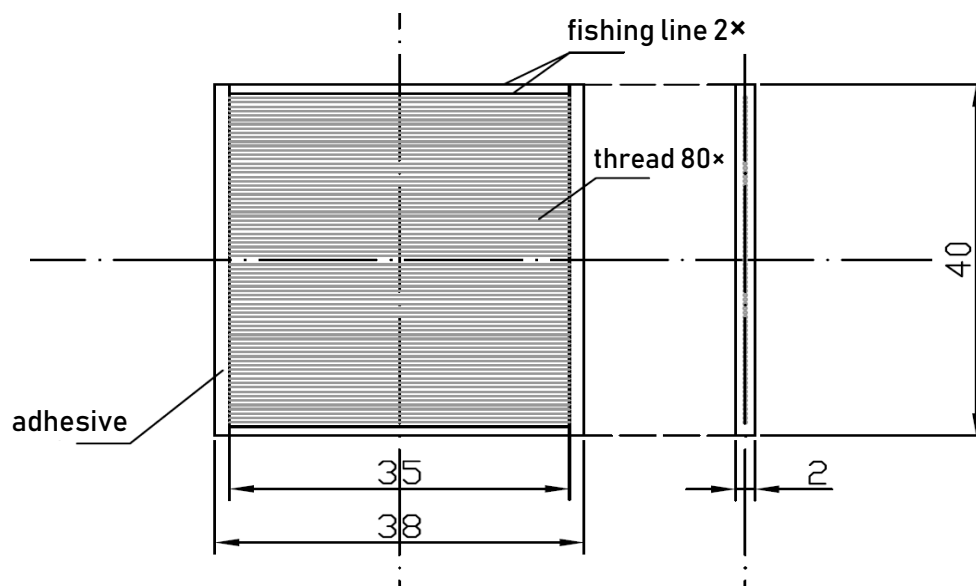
Technical drawing of the planar arrangement. Dimensions in mm.
